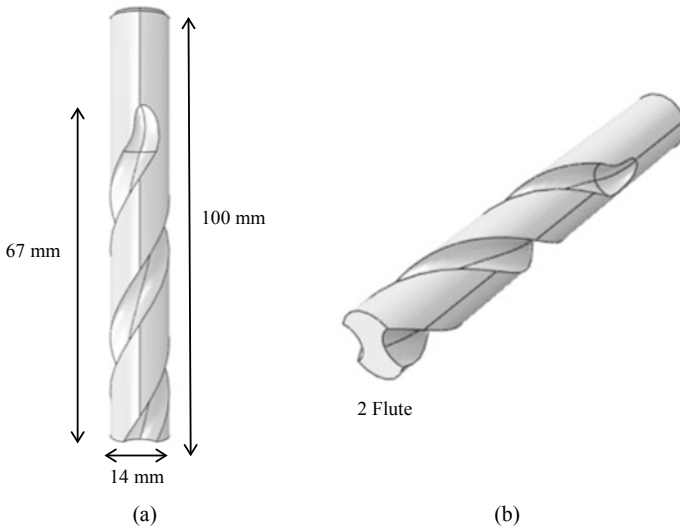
Flat end mill cutting tool a front view b three-dimensional view
